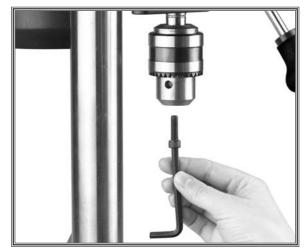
Inserting the hex cap screw (chuck guard removed for clarity).
